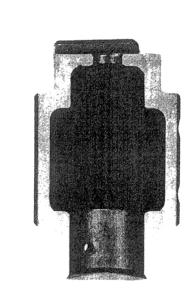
Sections through reduction gear teeth driving gear, pinion and sun gear. FIG. 29. Section of reduction gear pinion trunnion.
